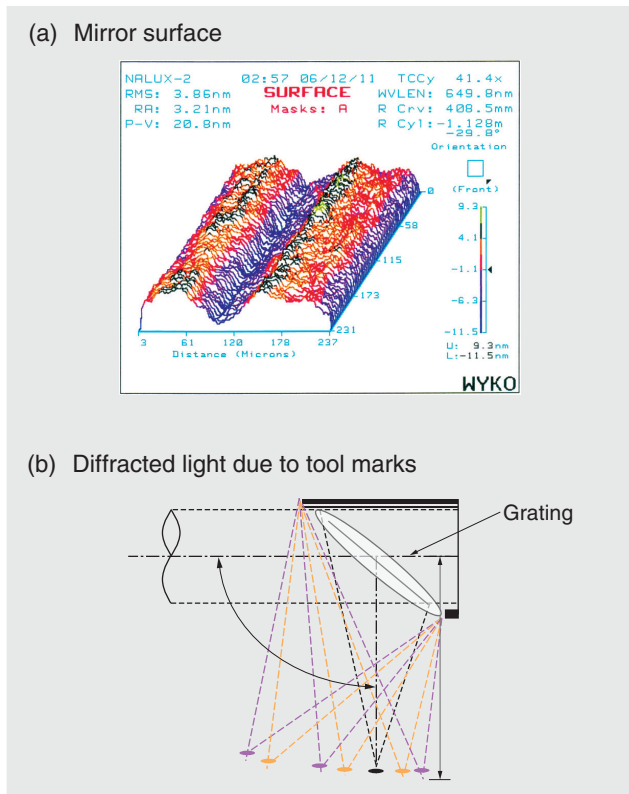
Mirror Surface and Diffracted Light due to Tool Marks
